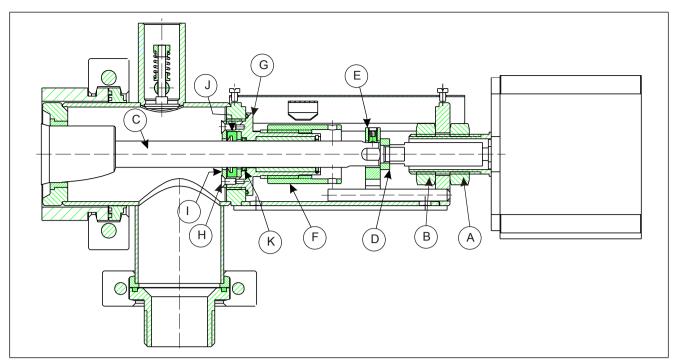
SD505 sampler body: A & B - mounting nuts, C - closing piston shaft, D - support ring, E - piston rotation guard, F - sample flow rate regulator nut, G - sealing element, H - fastening screw, I - bushing plate, J - piston shaft wiper, K - piston shaft gasket.
